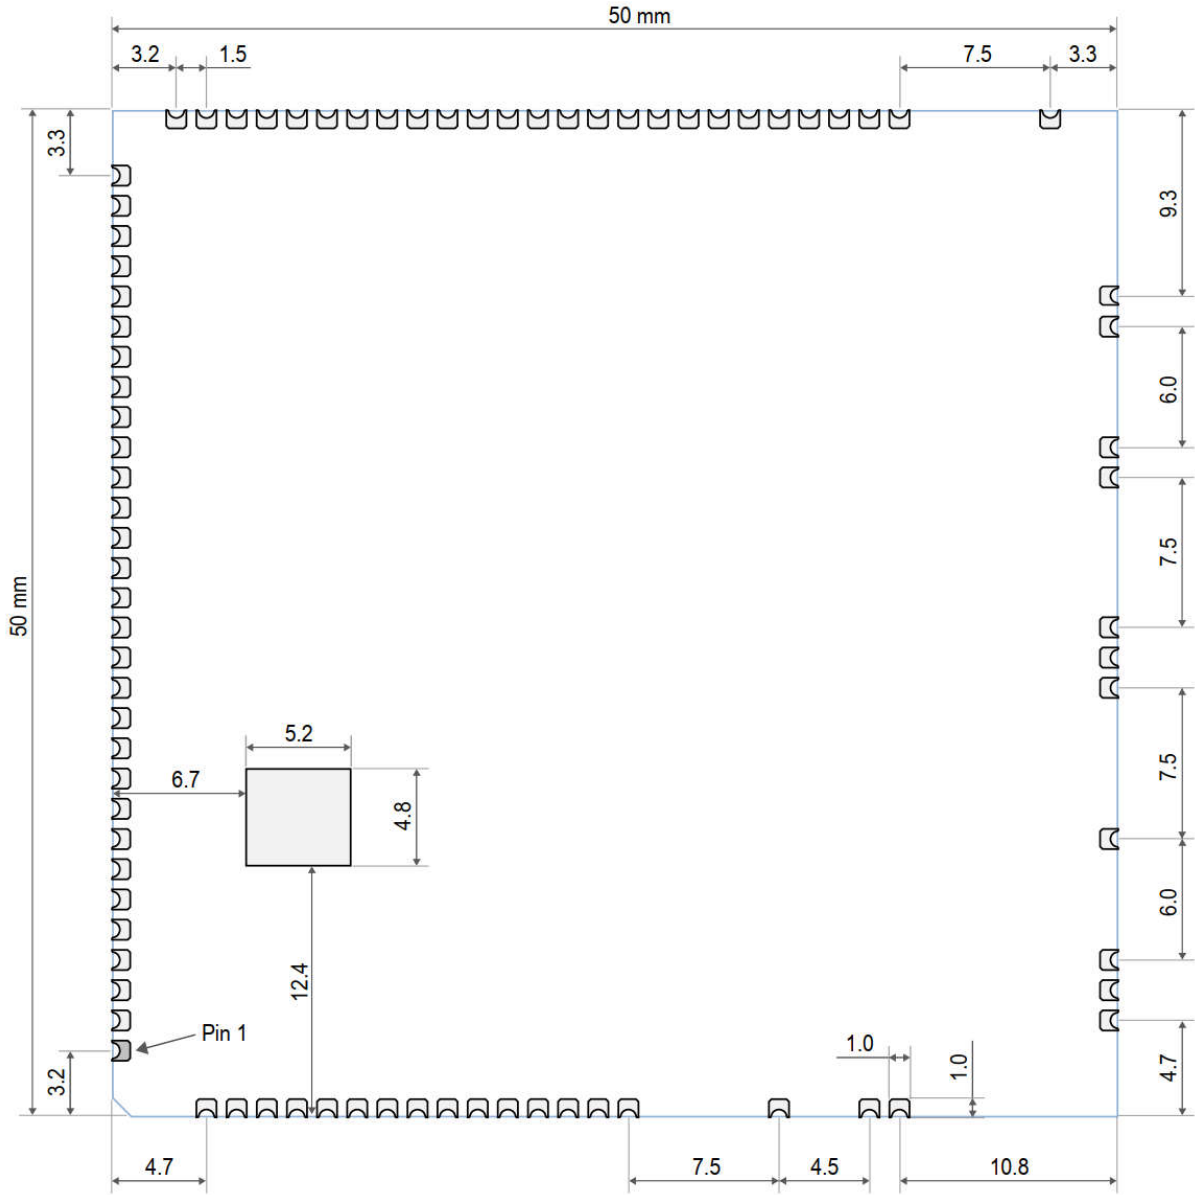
PCB FOOTPRINT (TOP VIEW)
